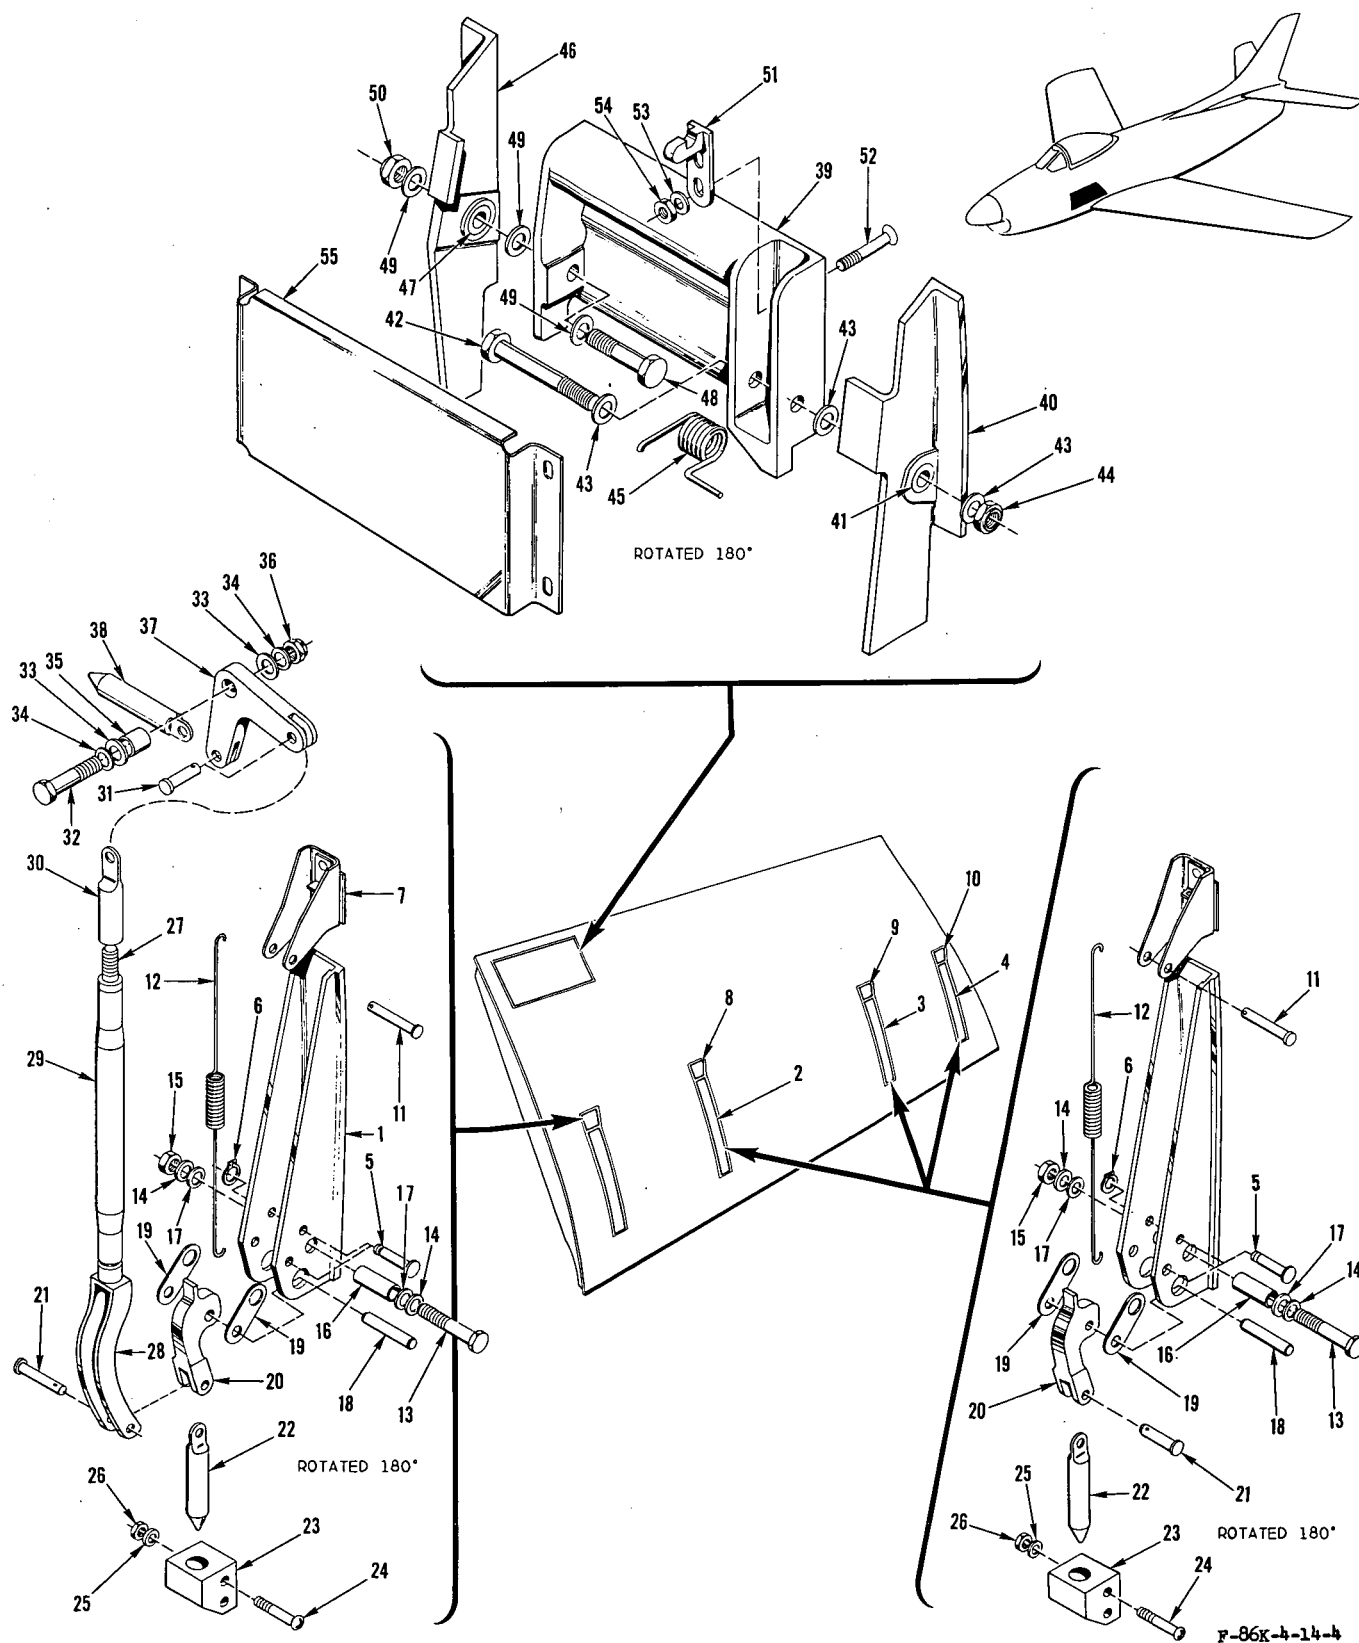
FUSELAGE STATION 70.25 TO CANTED STATION 124.318 GUN BAY ACCESS DOOR ASSEMBLY
